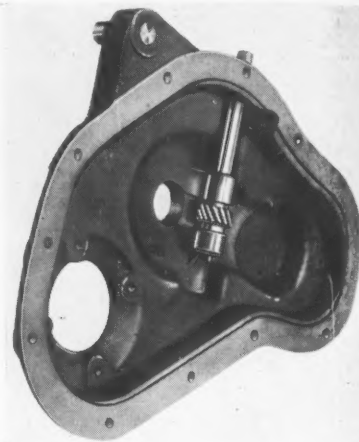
Showing the Interior of Timing Gear Cover and Battery Ignition Drive Assembly
